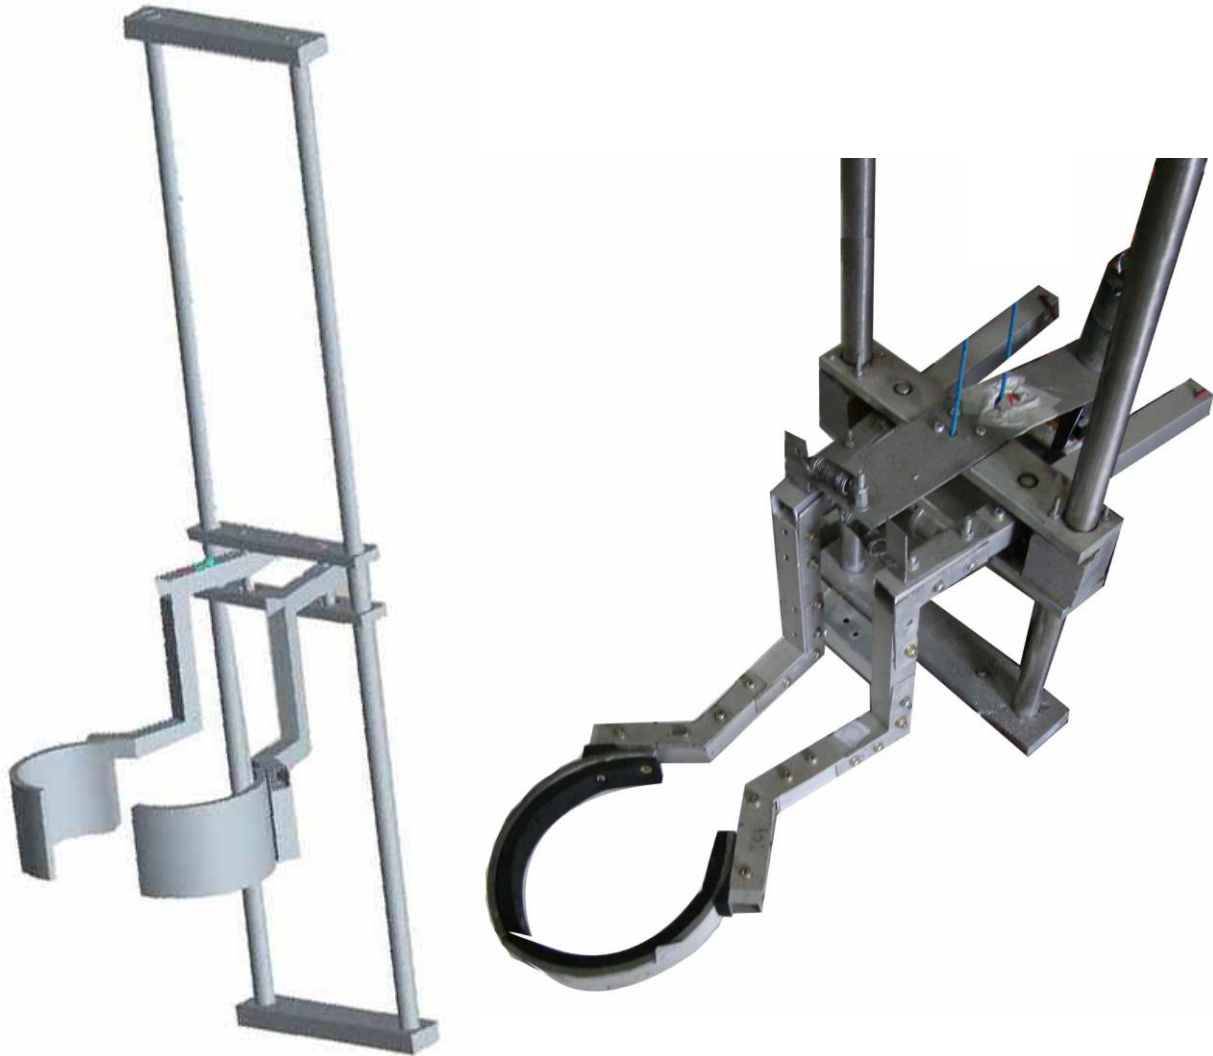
Pro Engineering Model and actual gripper of Manual machine
